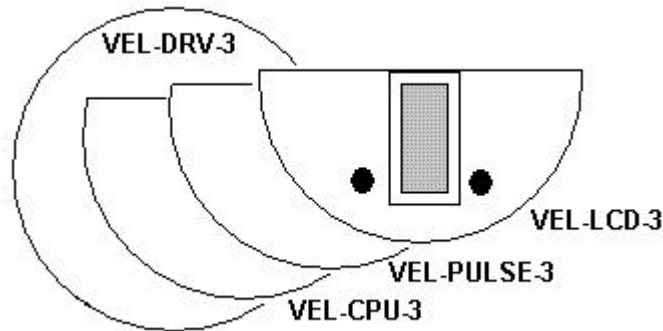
Board stack assembly (VEL-LCD-3 board is optional).
